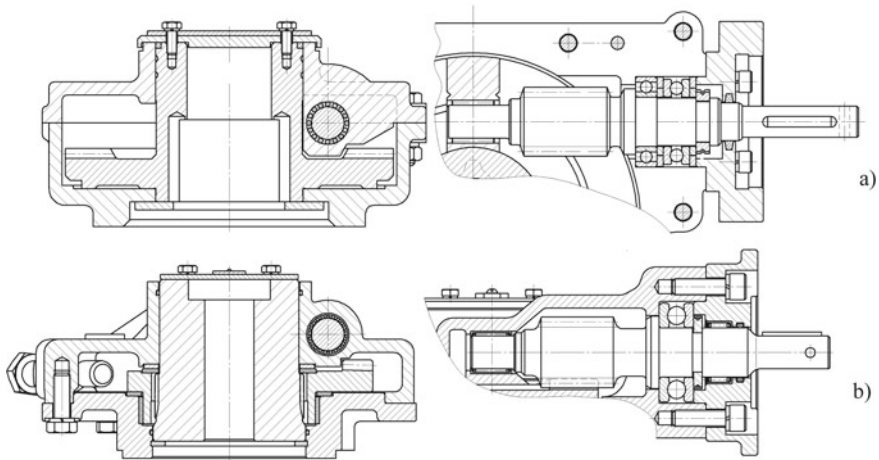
Section view of the gearbox a RS1-60 and b RZA-S-2000
